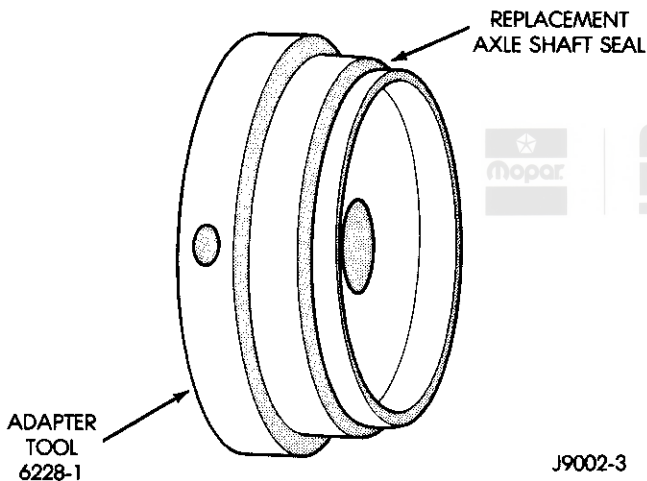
Replacement Axle Shaft Seal & Tool 6228-1
